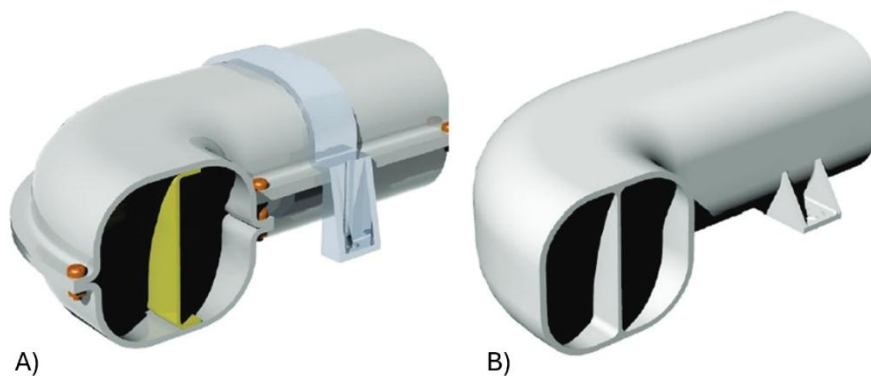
Example of a 16-part assembly (A) reduced to a single part (B) that could be manufactured using AM. Reproduced from ASM handbook Vol. 24 [2].
